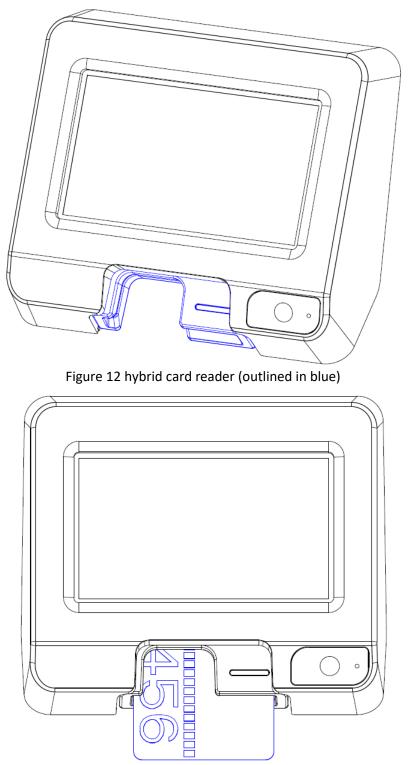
using the hybrid card reader (inserted card outlined in blue)
